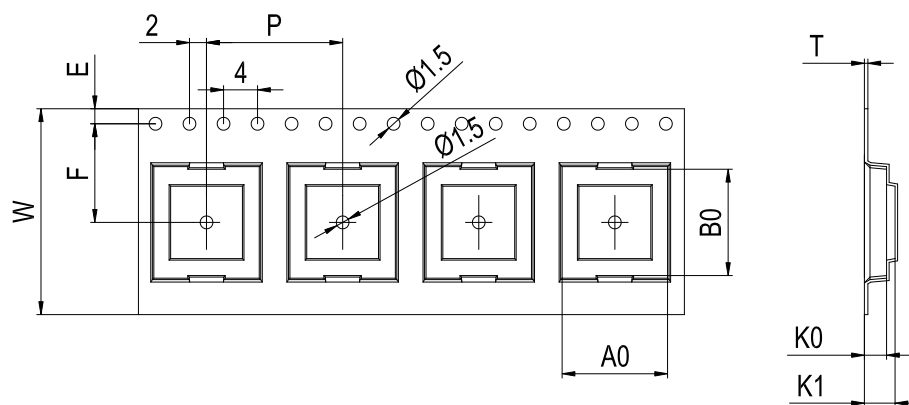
Carrier Tape Dimension Drawing (Unit: mm)
